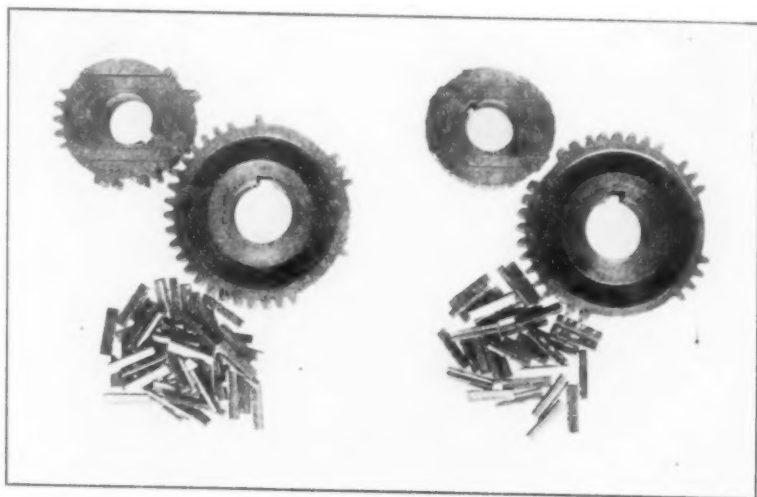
30 TOOTH ENGAGING 40 TOOTH, TEST 00, SERIES 1 AND TEST 28,
